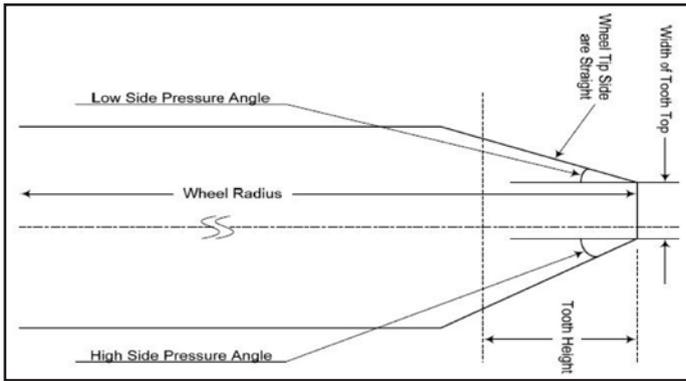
Grinding wheel geometry for Spiroid gear pinion.
